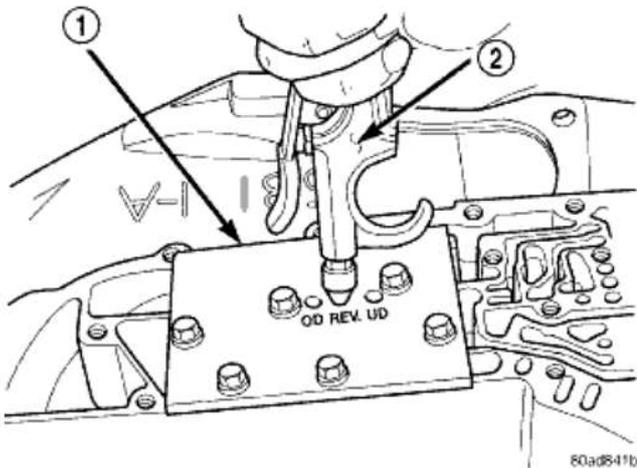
Testing Clutches Using Air Pressure Test Plate 6056
